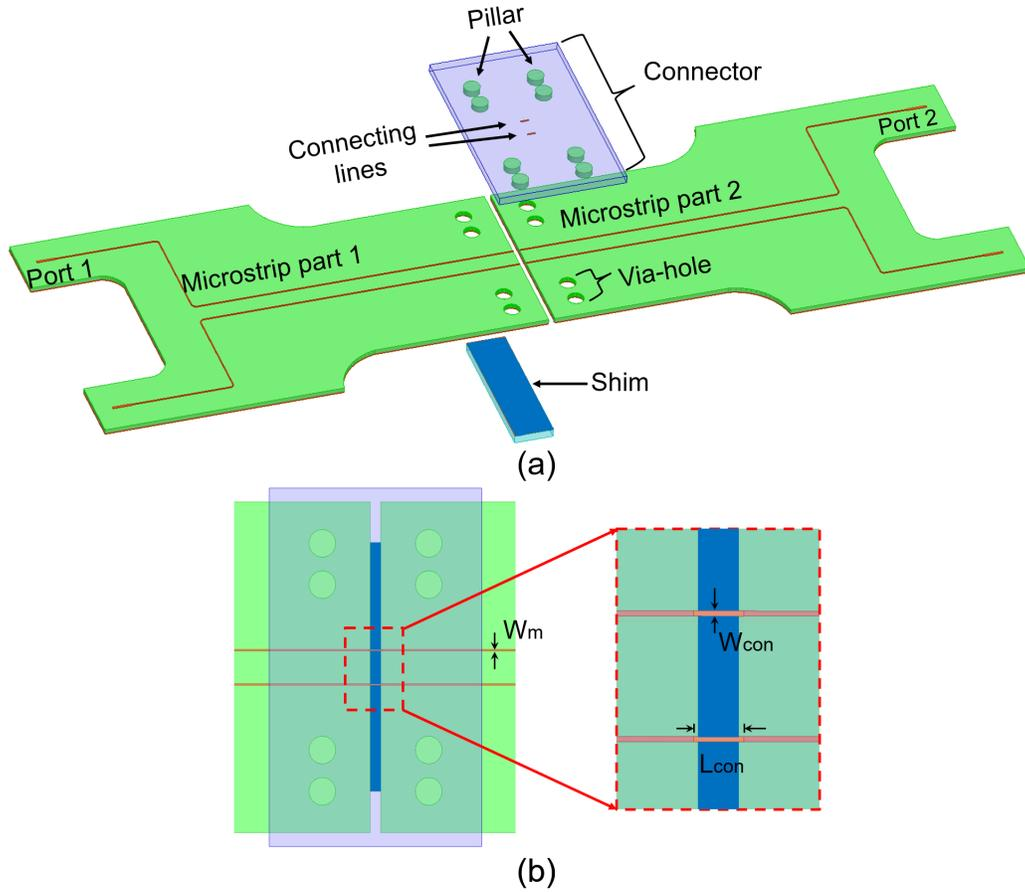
Design details and connection approach for Cu-based thin-film microstrip cables. (a) 3-D view showing cable and connector assembly in a disassembled configuration. (b) Top view of microstrip connection region. Dimensions: width of microstrip (W_m) is 50 μm , connecting line length (L_{con}) and width (W_{con}) are 500 μm and 55 μm , respectively.
